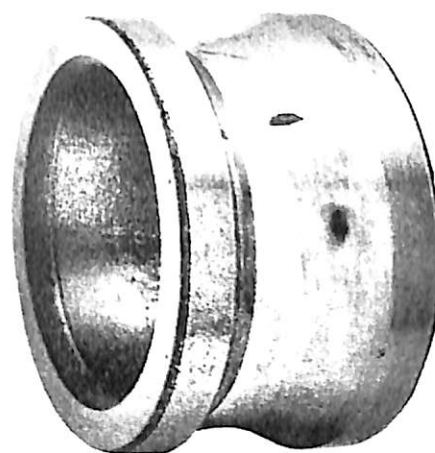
Pitting in inner raceway of deep groove ball bearing
